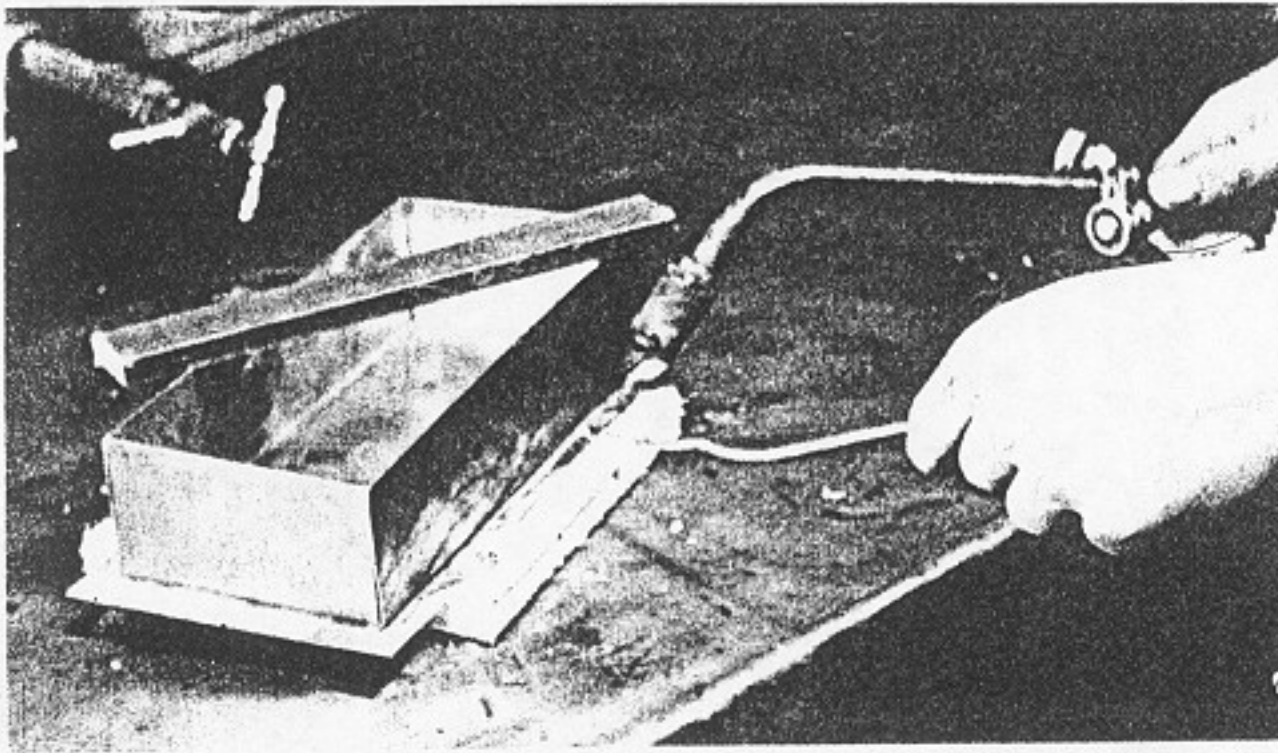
When a blowpipe is used, the metal itself actually becomes the soldering copper. For this reason it is difficult to hold. Set it on an asbestos pad or hold it together with a weight, or wire.
